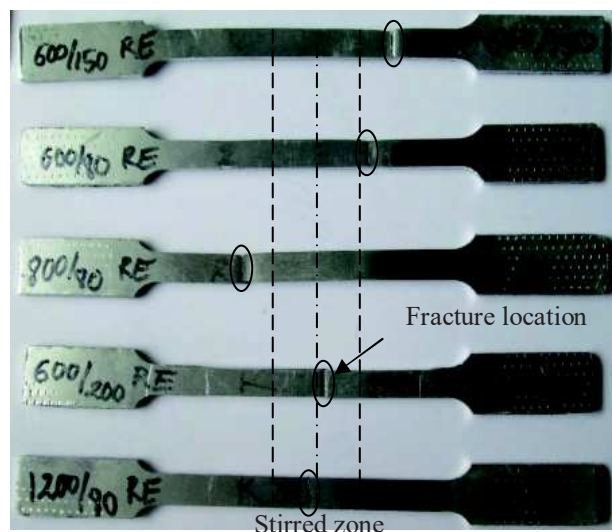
Tensile fracture locations in the FSWs; the shoulder limits at the dash lines and weld centre at the dash-dot line
